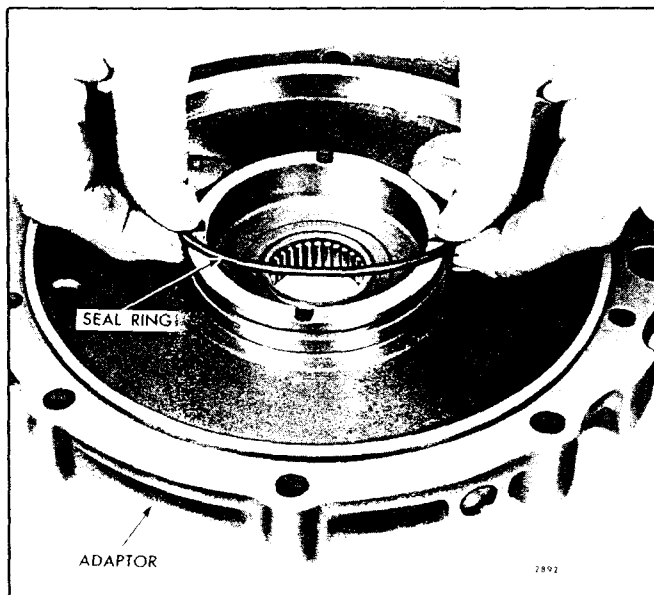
Installing Reverse Clutch Piston Seal Ring in Adaptor
